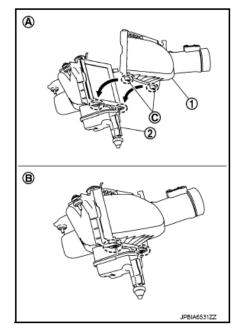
Inserting Pawl Of Air Cleaner Cover Into Air Cleaner Body Courtesy of NISSAN NORTH AMERICA, INC.
